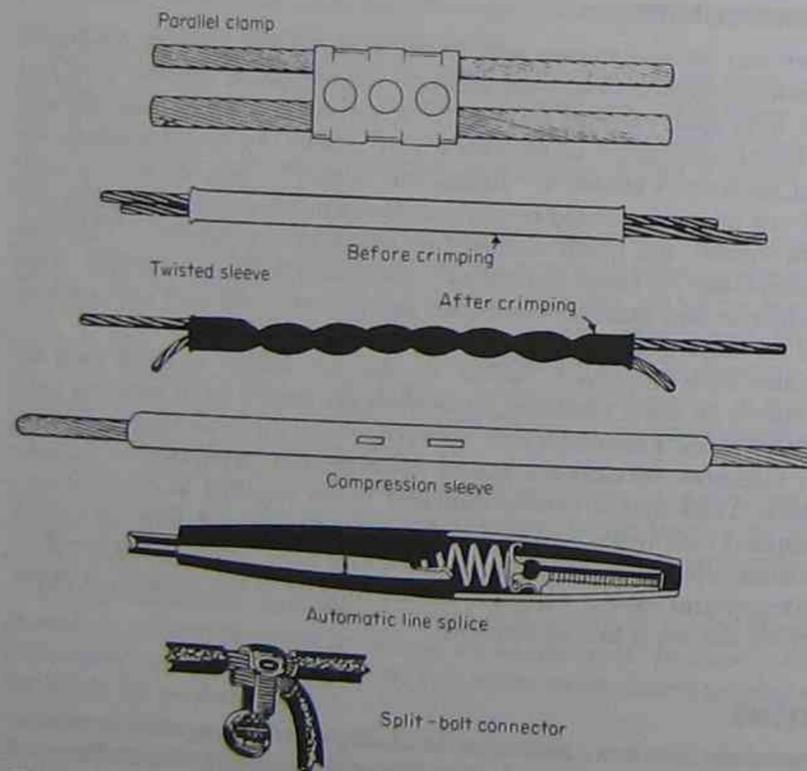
Mechanical connectors. (Courtesy Burndy Corp.)
